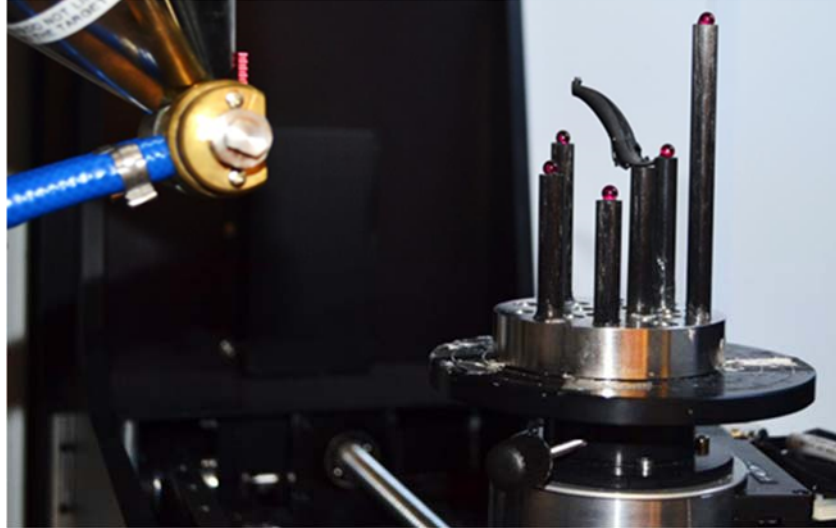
CT crown positioned on a CT scanner rotary table with the industrial assembly
